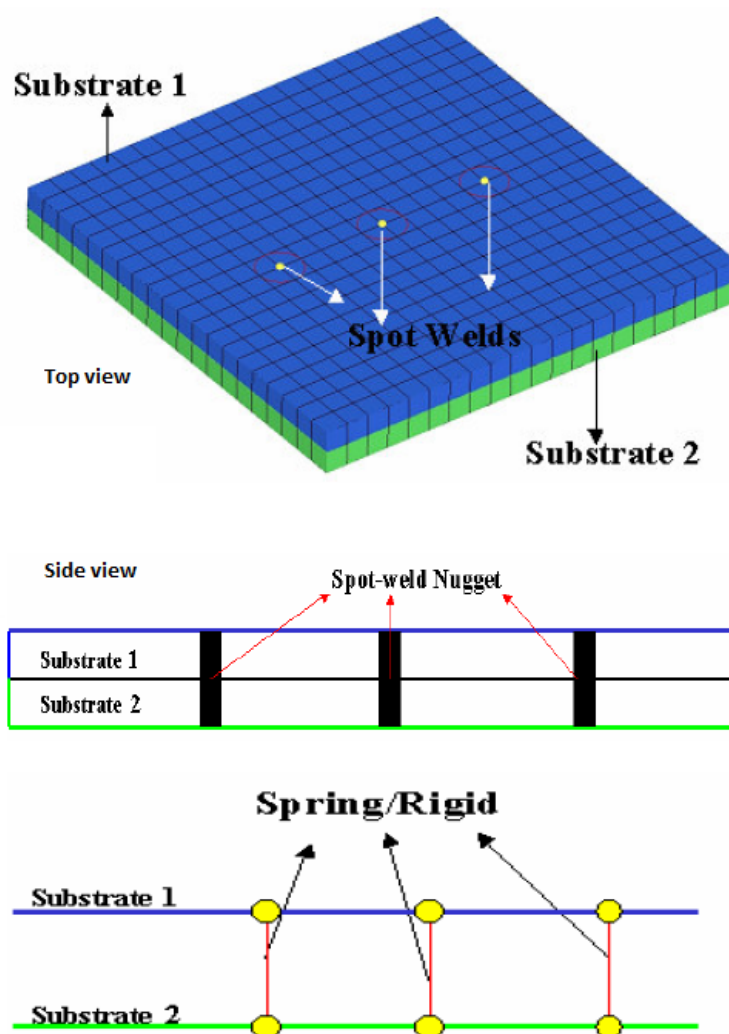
Spot weld model using spring elements, top and side view [2].
